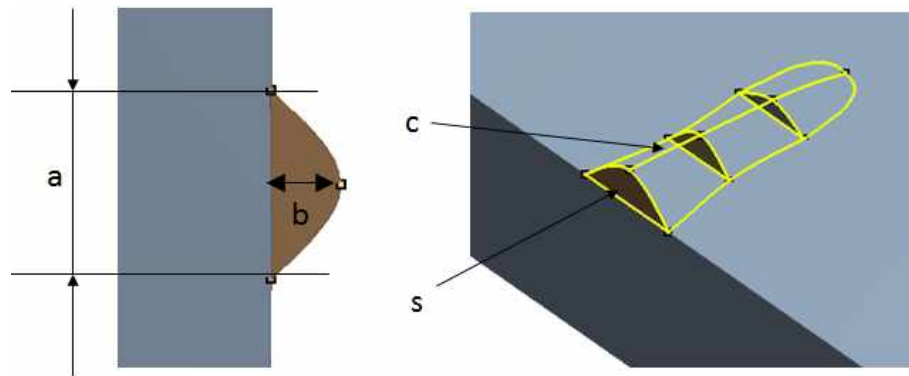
Parametric representation of the surfaces that define the welding bead
